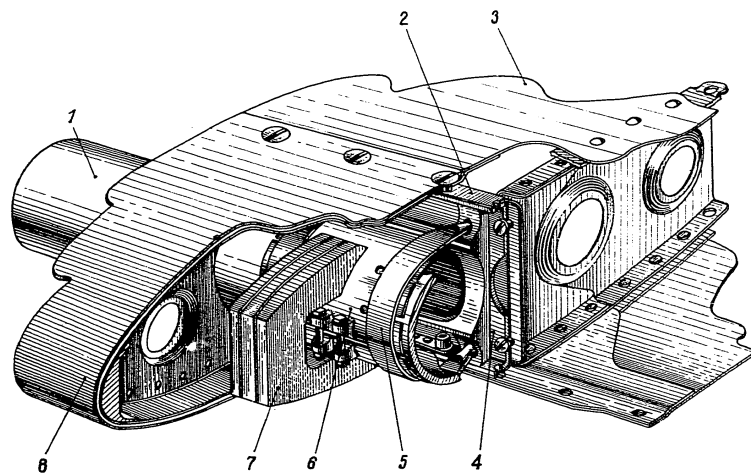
BLADE SECTION ASSEMBLED ON SPAR
